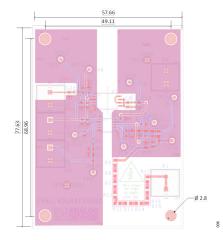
EVAL-ADuM3195EBZ Dimensions (mm)
